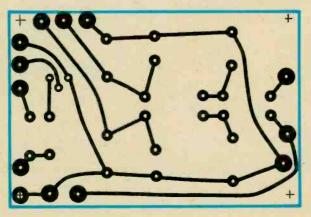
Full-size template of pc boards. Copy onto board or use perfboard and push-in terminals. Crosshairs indicate position of mounting holes. Note that lower left mounting hole on PCB 1 also serves as circuit chassis ground.
